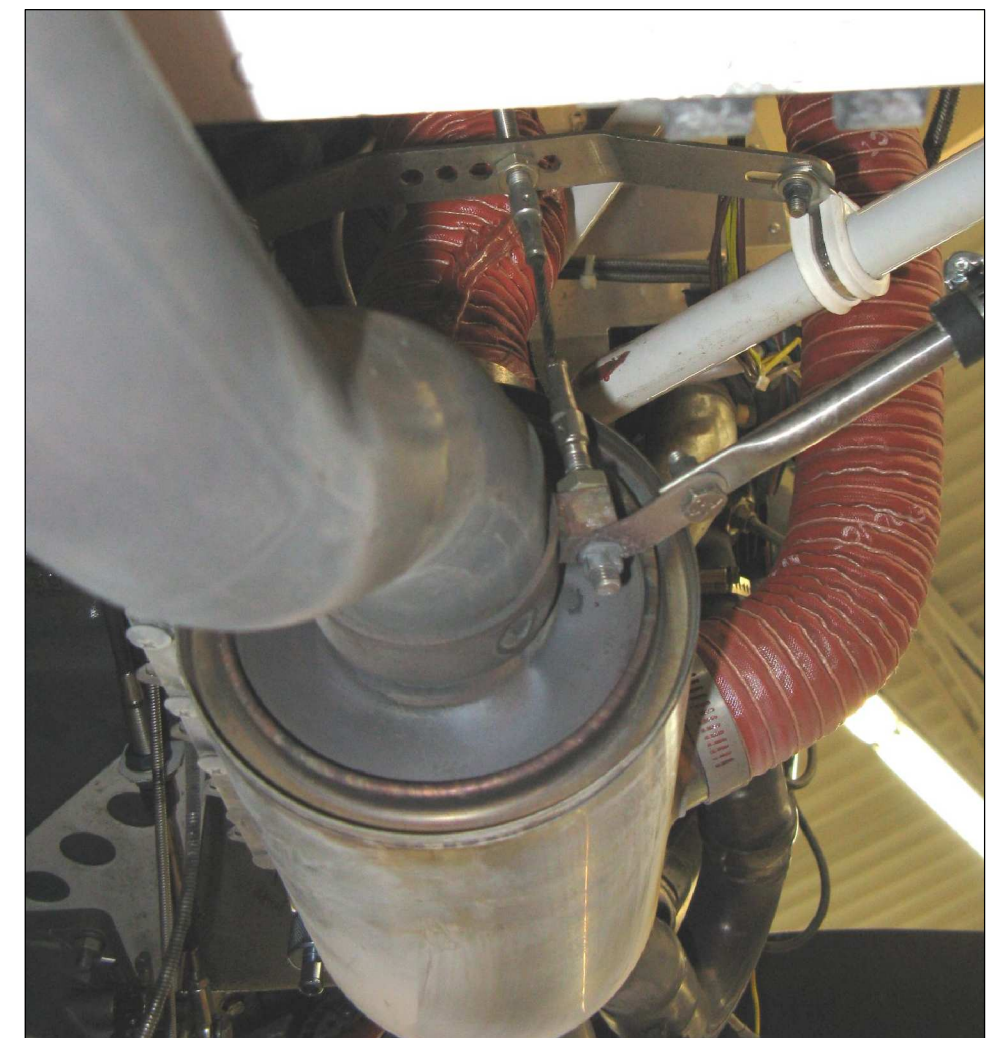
BALL JOINT ASSEMBLY DETAIL VIEW
